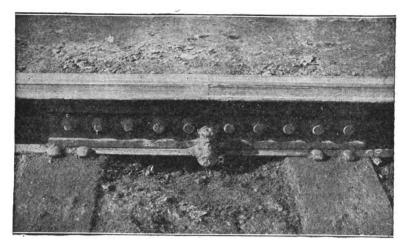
Rails Welded by Thermit Process Courtesy of Goldschmidt Thermit Company
